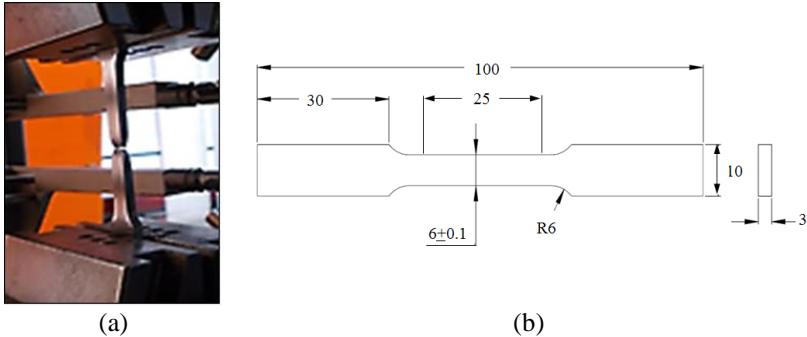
(a) Experimental setup for tensile test, (b) Specimen geometry used for tensile testing (all dimensions are in millimeters).
